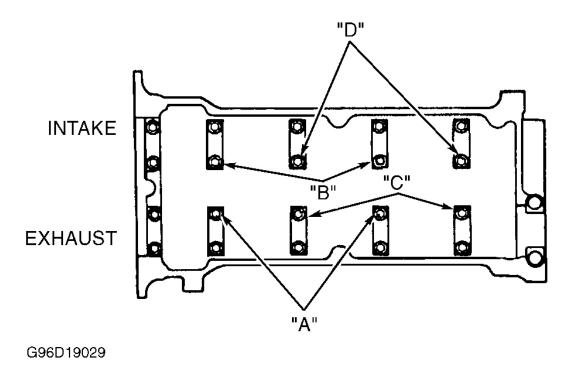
Identifying Camshaft Cap Bolts For Valve Adjustment Courtesy of MAZDA MOTORS CORP.
